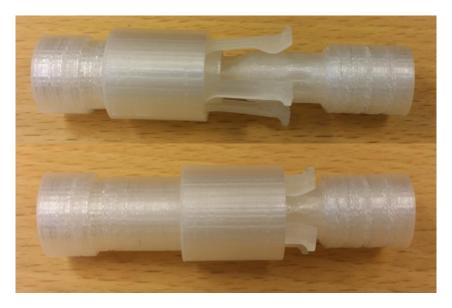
3D-printed prototype of the snap-fit concept assembled.
